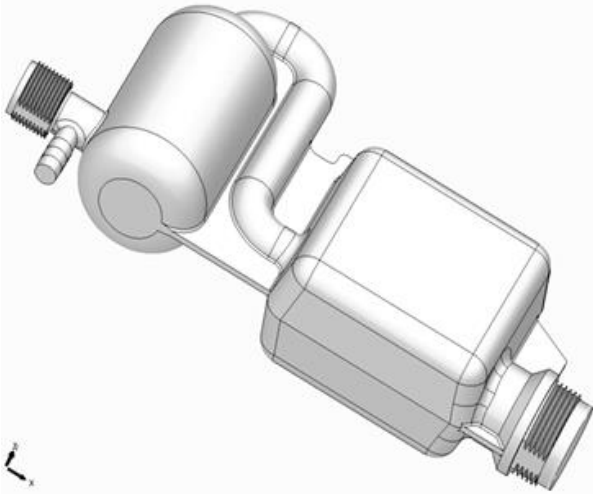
The CAD designed workpiece – this workpiece represent an expansion tank for different washing machines
